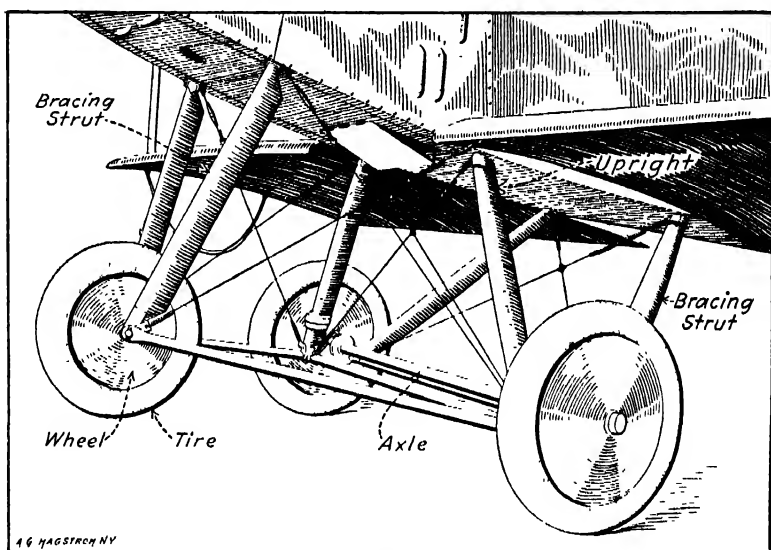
Airplane Landing Gear of Three Wheel Type Showing Main Components.
